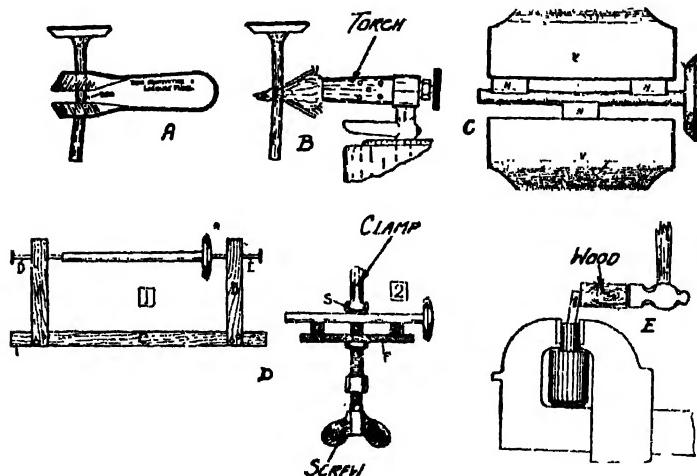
Simple Methods of Straightening Bent Valve Stems.
